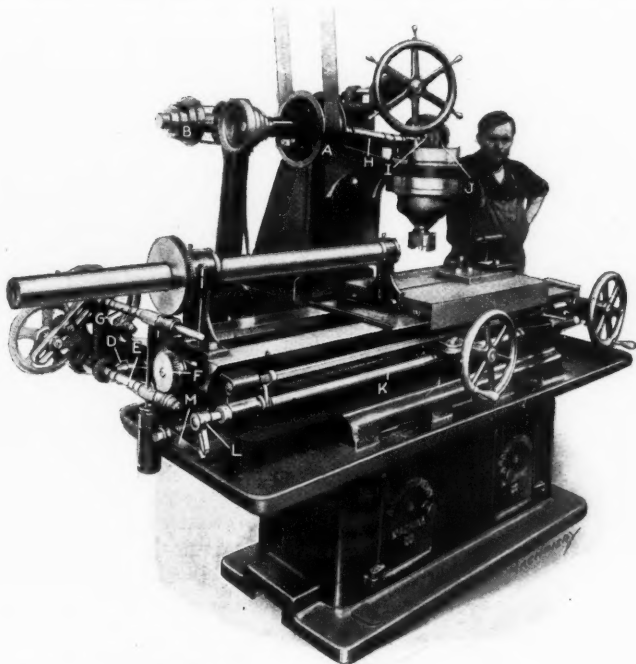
Bowen Milling Machine built by Bond Foundry & Machine Co.
